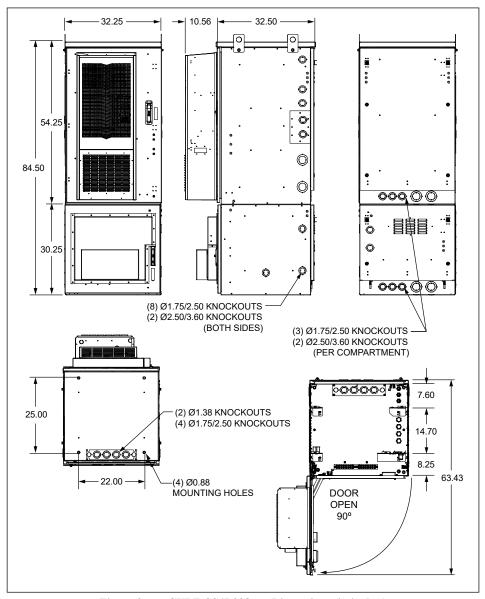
CUBE-SS4B228xxx Dimensions (in inches)
